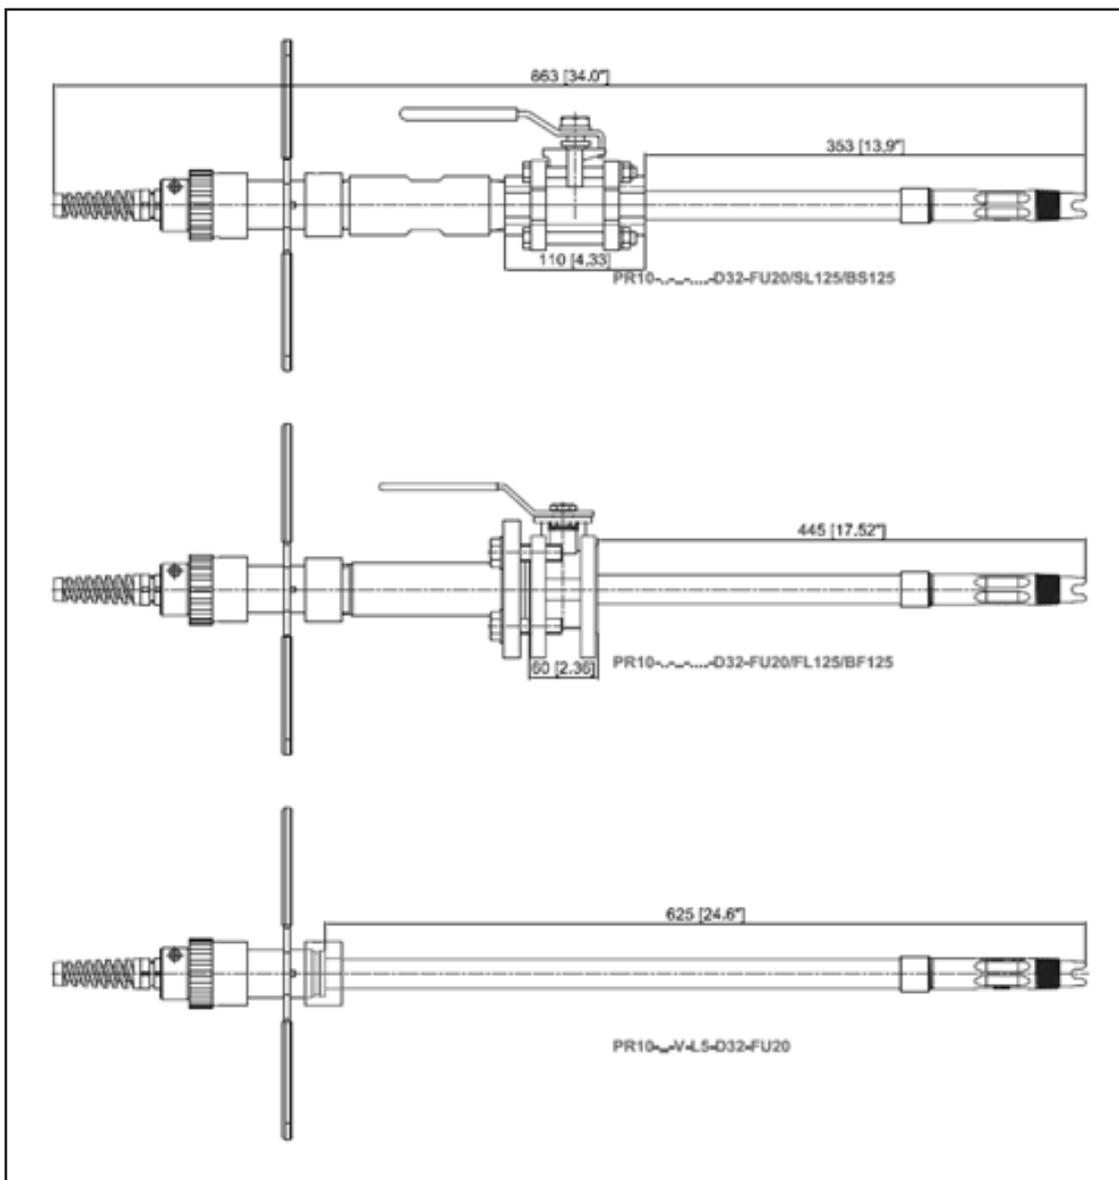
Dimensional drawing PR10...-D32 with mounted FU20 sensor units mm (inches)
